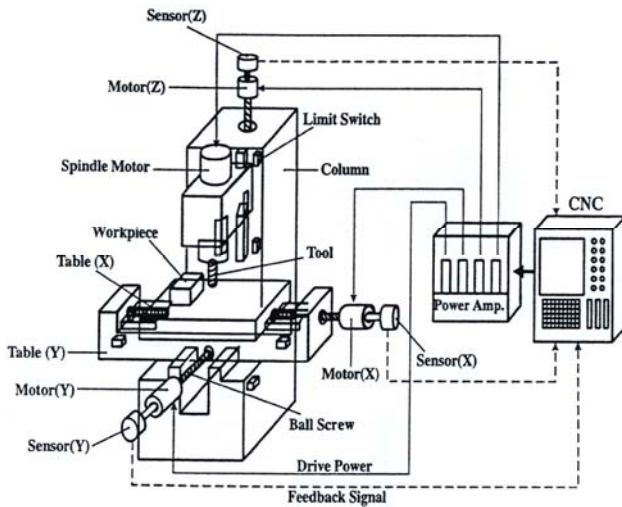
Diagram of a 3-axis CNC machining center and feed drive mechanism with ball screw [11].
